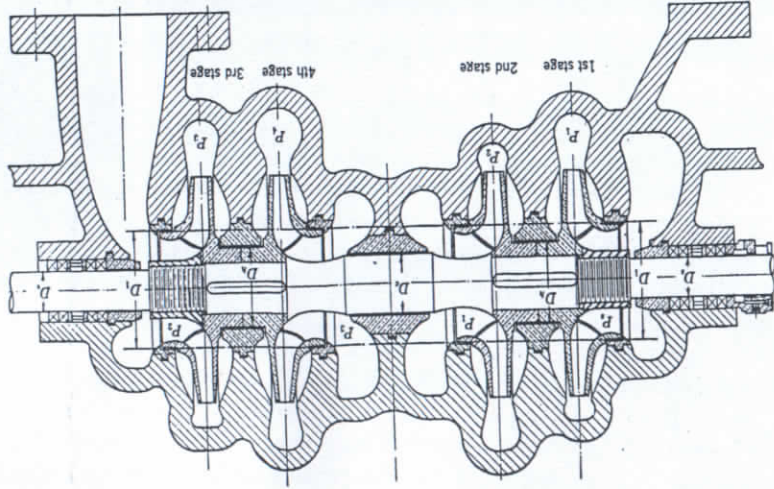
Four-stage pump. Axial thrust due to shaft shoulders and impeller hubs.
